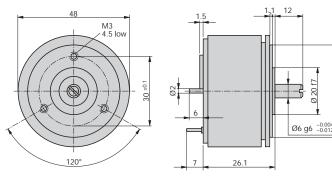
KINAX 2W2 with special drive shaft at front and at rear. At front: Ø 6 mm, length 12 mm. At rear: Ø 2 mm, length 6 mm.
